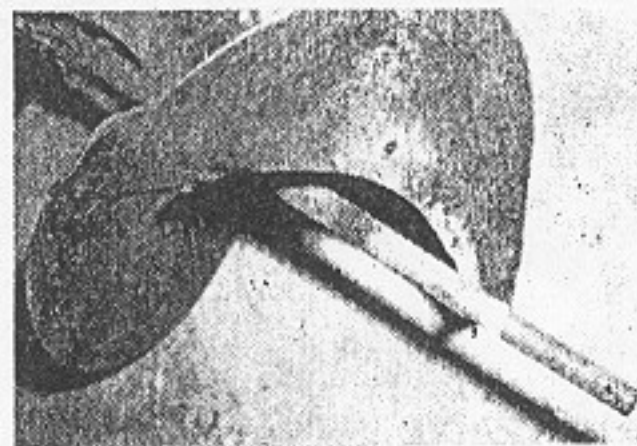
Broken axles, as on this manure spreader, are easily repaired by welding.
